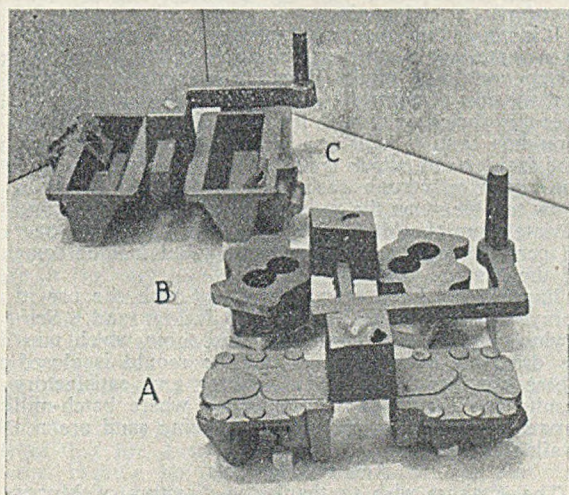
EXAMPLES SHOWING TWO CASTINGS RUN AND FED FROM A SINGLE BLOCK-RUNNER. CASTINGS A ARE SUBJECTED TO A HIGH HYDRAULIC-TEST-PRESSURE AFTER MACHINING. THREE PATTERNS ARE SHOWN, A AND B ARE GROUPED.
